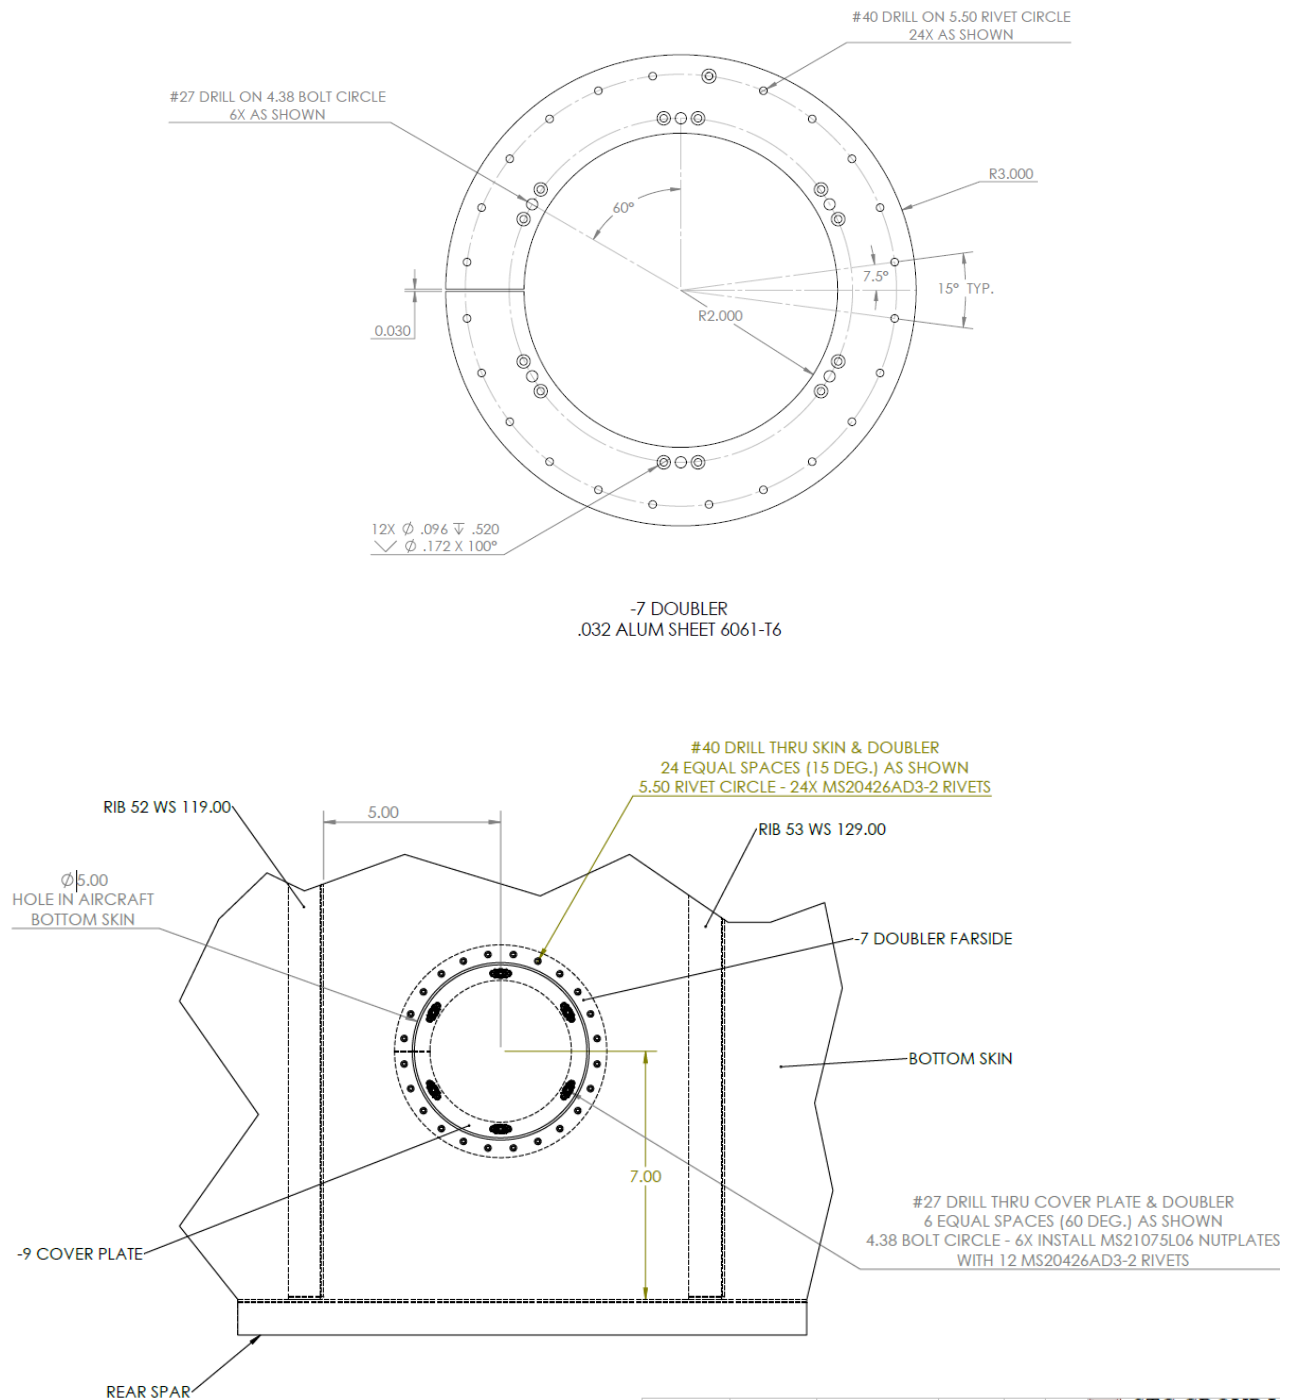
ROLL INSPECTION PLATE DOUBLER
